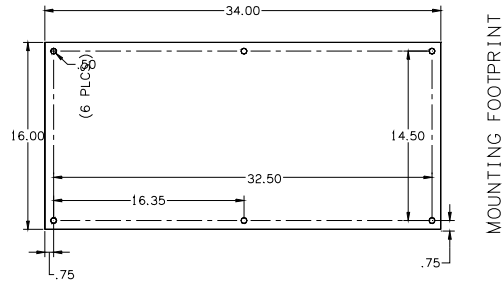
3460R-R10 Chassis Dimensional Outline
